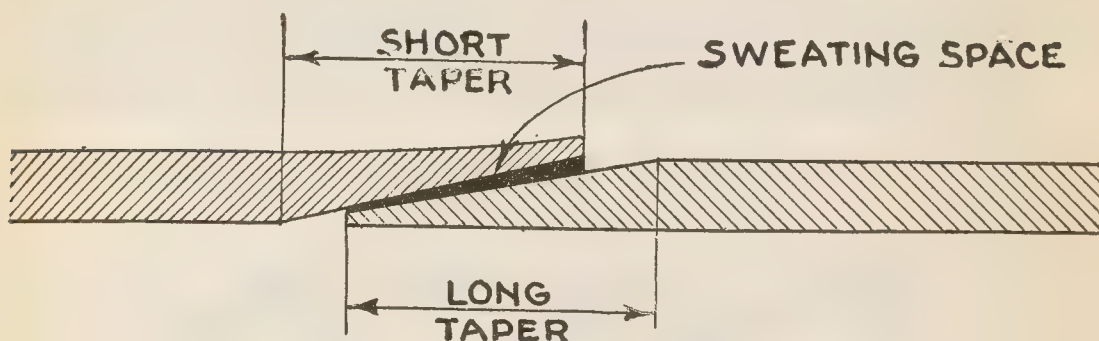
,436.—Enlarged section of one side of female and male ends in position showing short and long tapers forming an annular space of triangular section between the taper into which the molten solder can penetrate, being kept fluid by the external heat; this is a kind of sweating process.
